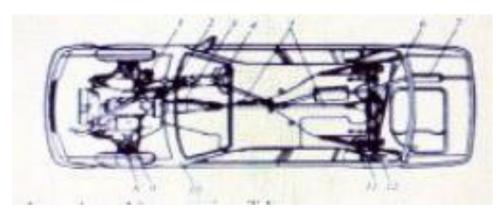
General structure of the car. Engine 1; 2-headband; 3-gearbox; Rule 4; 5-Cardan extension; 6th leading bridge; 7th sucker; 8-front wheel brake mechanism; 9-front wheel column (suspension; Body 10; 11-rear suspension; 12-rear wheels brake mechanism.
